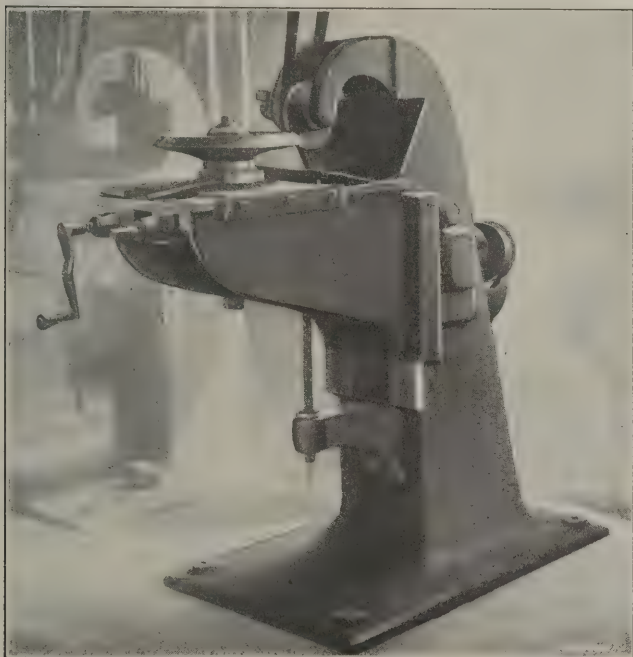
Special Grinding Machine used for Grinding the Segments for the Path of the Balls in the Machine shown in Fig. 13
